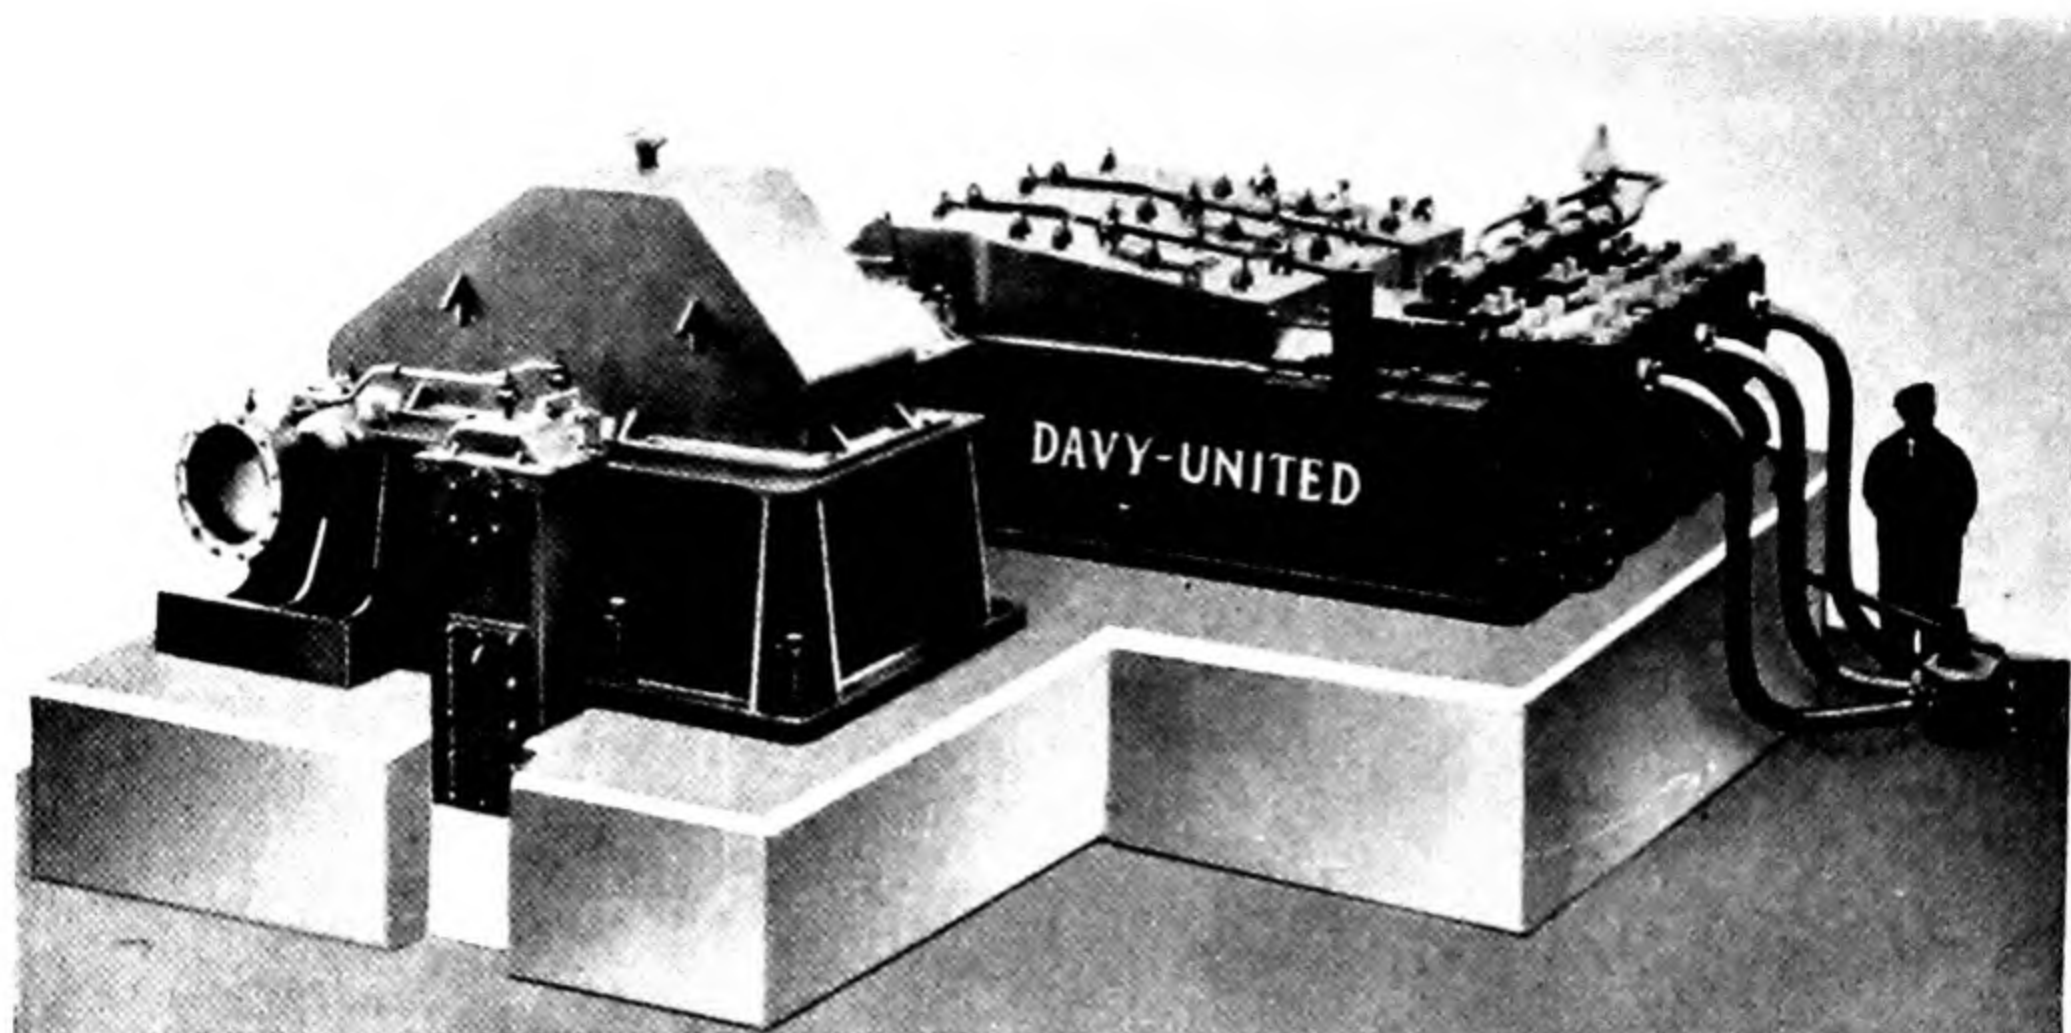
Totally enclosed three-throw pump for transmitting 1100 h.p.
